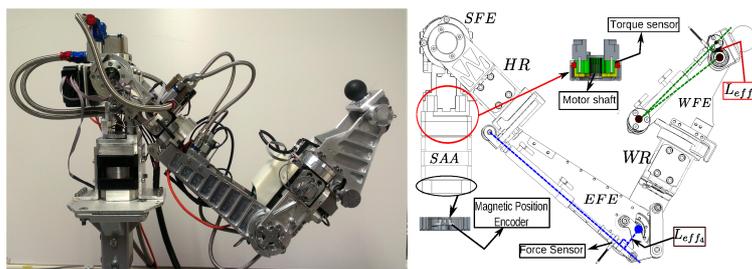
The HyArm: (left) Real robot side view (right) CAD model showing actuator arrangement (see section 4 for further details)
